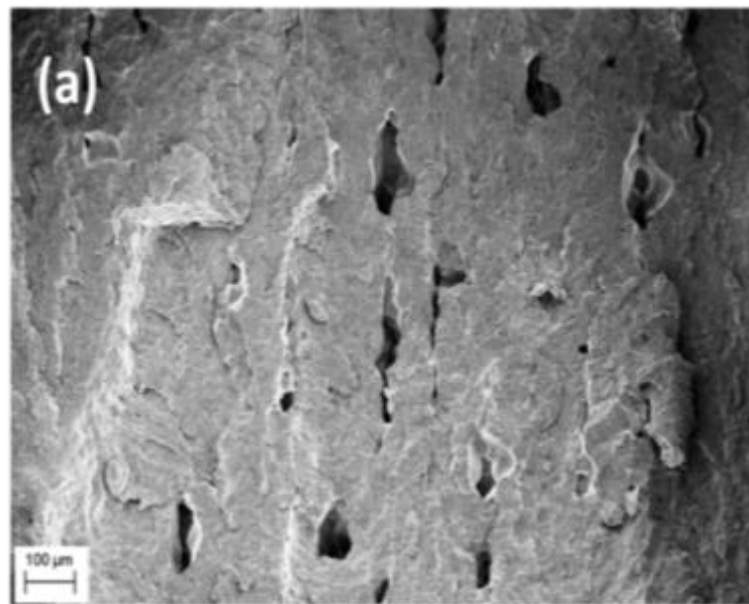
15a: Fracture surface of (a) PA12 sintered part
